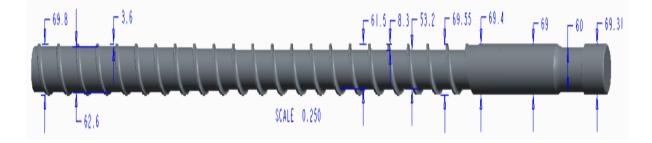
Drawing of Reciprocating Screw of Diameter 69.8 mm
